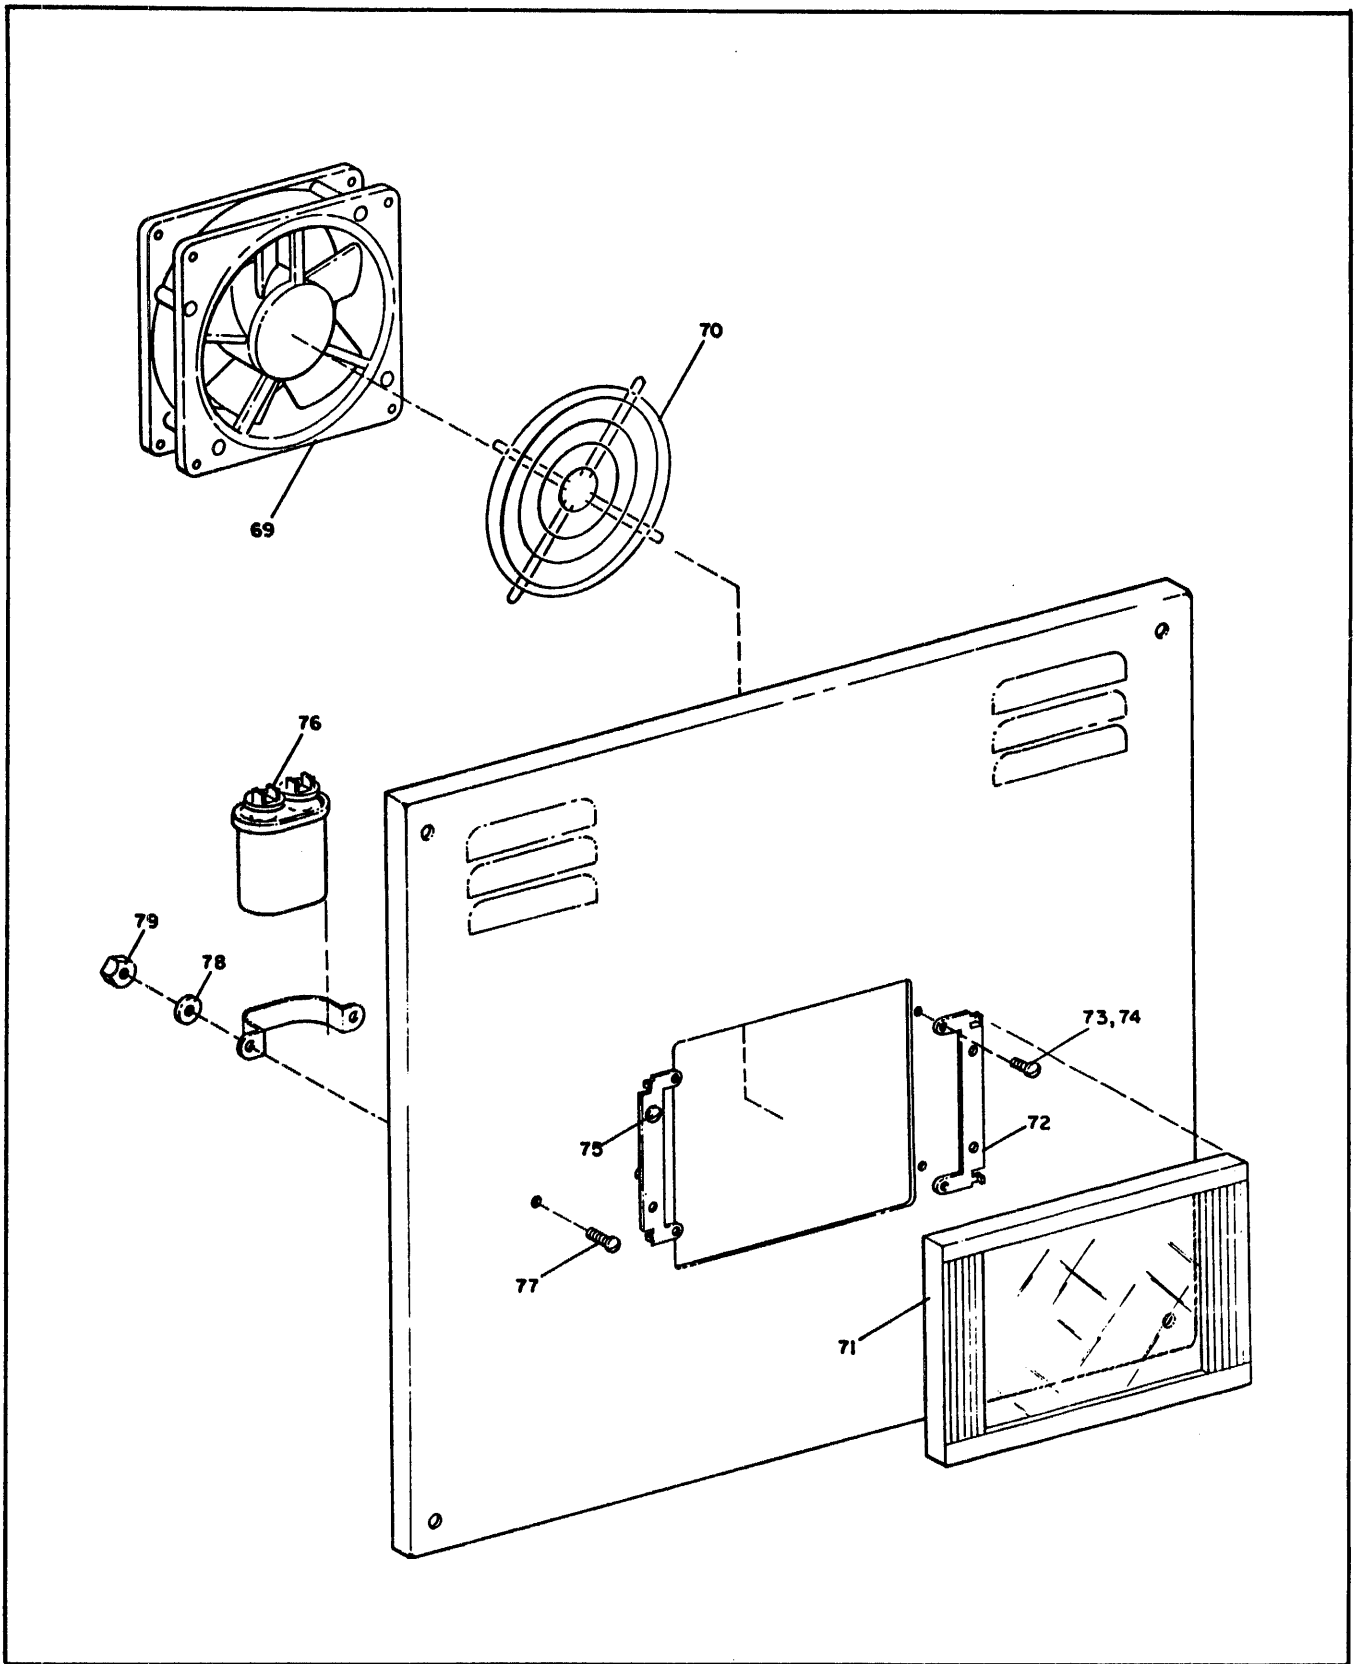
TRIM GROUP ASSEMBLY (sheet 4 of 6)
